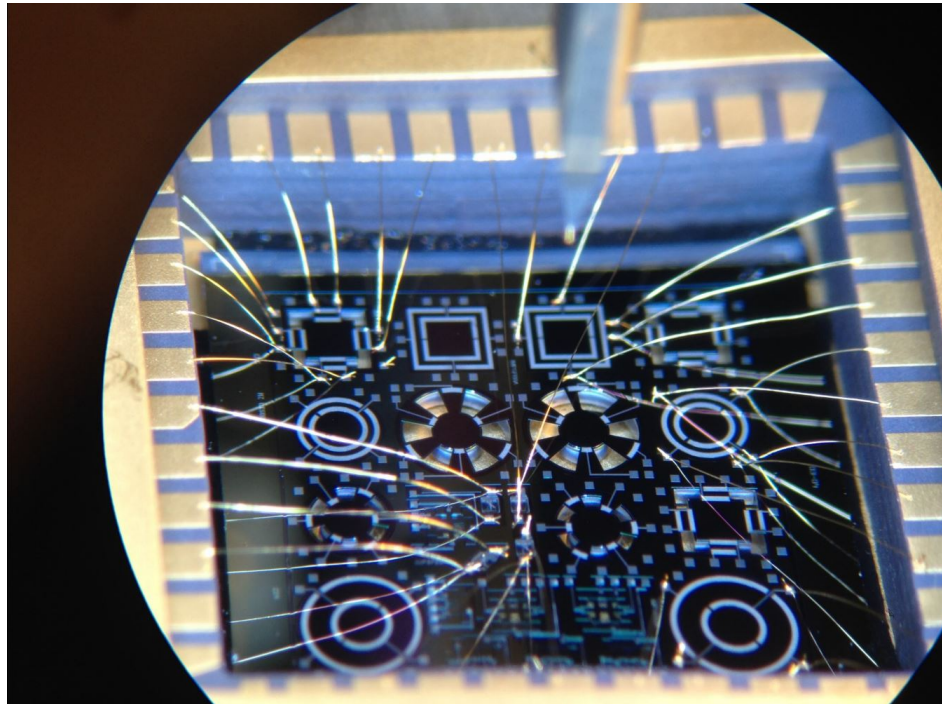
Photo of Au wire welded devices by wedge bonder
